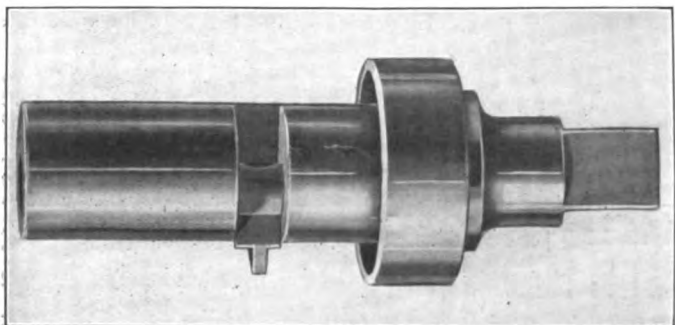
Faessler Cutter, Used for Cutting Off Flues in Boiler, Preparatory to Removal.
